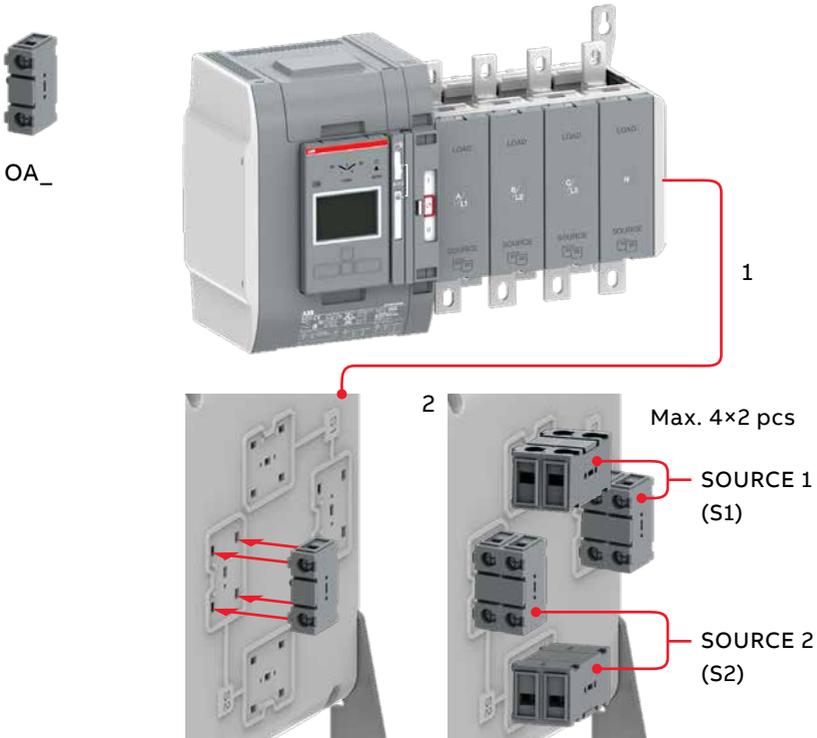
Mounting of the auxiliary contact blocks, type OA
